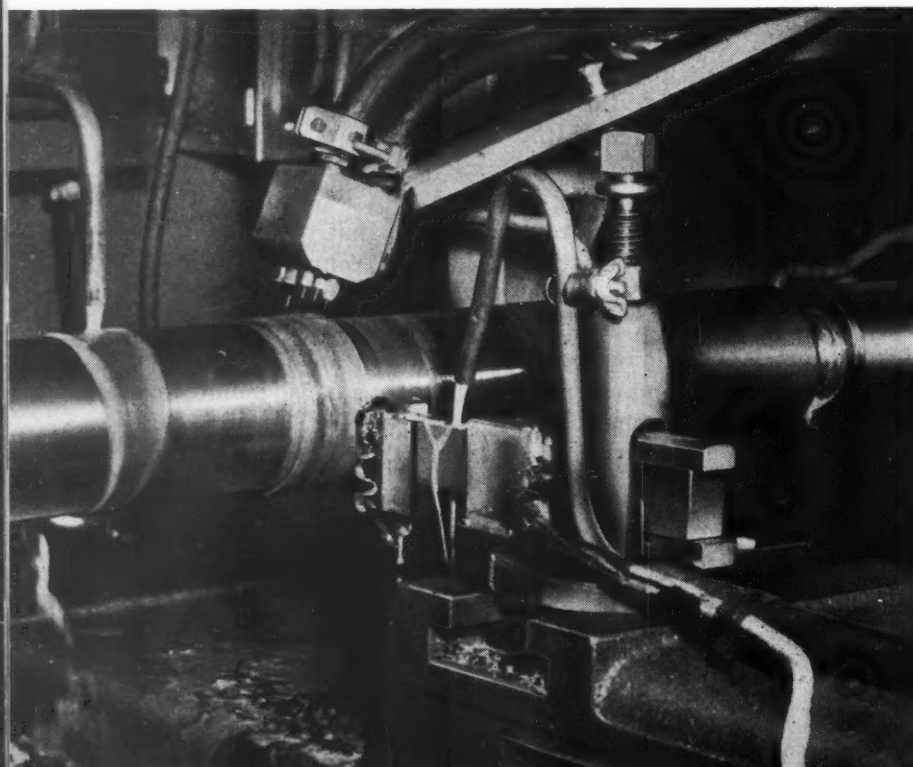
A gas-torch holding fixture is mounted on the lathe carriage to heat the work by means of oxy-acetylene flames and thus facilitate machining
